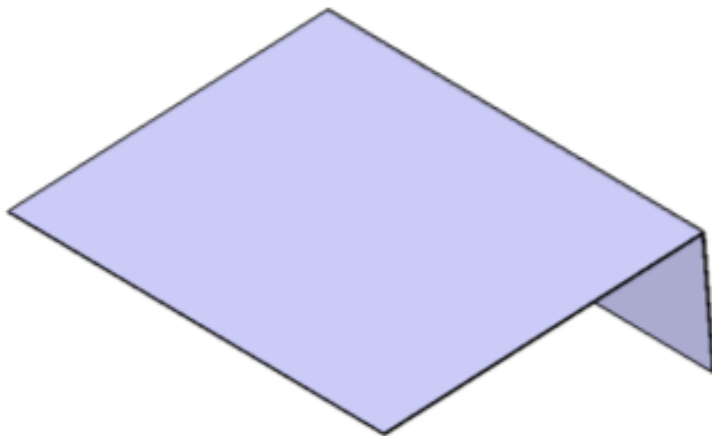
Bottom ducting for the left ducts; the right side is the same shape but slightly shorter as the front duct is not as wide for a single cooler; not modeled are holes for plumbing to pass through to the bottom reservoirs. This design could be improved with horizontal flanges to mount the piece to the diffuser easily with Velcro.
